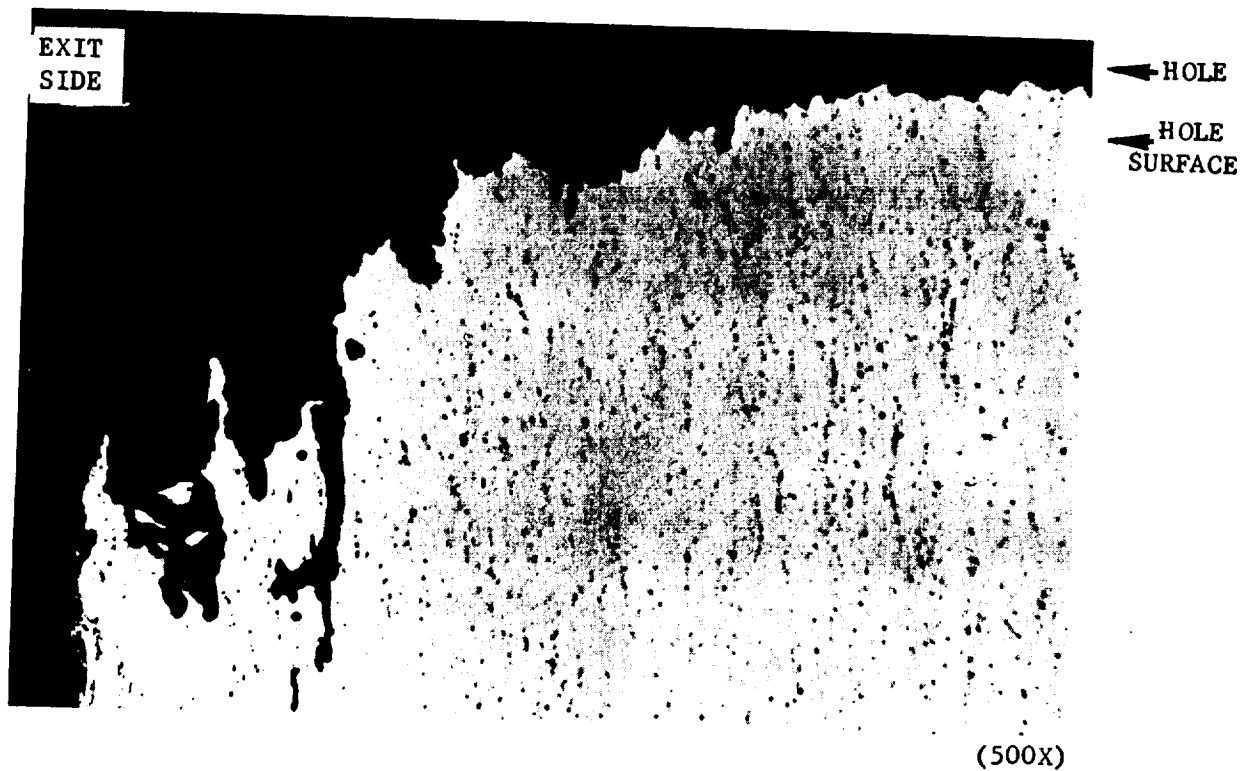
CROSS-SECTION OF HOLE DRILLED WITH DULL DRILL SHOWING SPALLED EDGE (UNETCHED)
